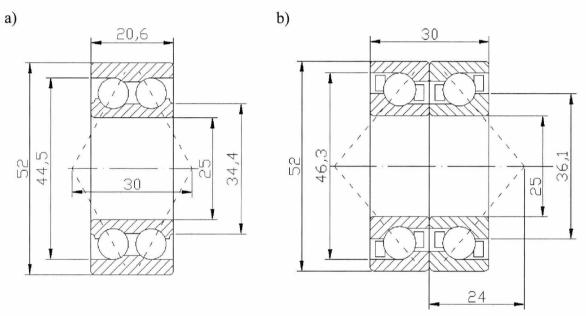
Bearing comparison a) double row bearing b) two single row bearings
